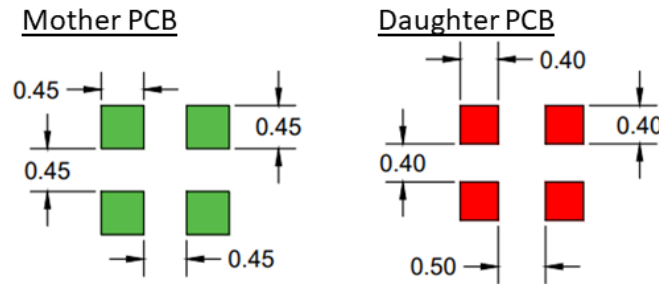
Mating pads dimensions for Mother and Daughter PCBs
